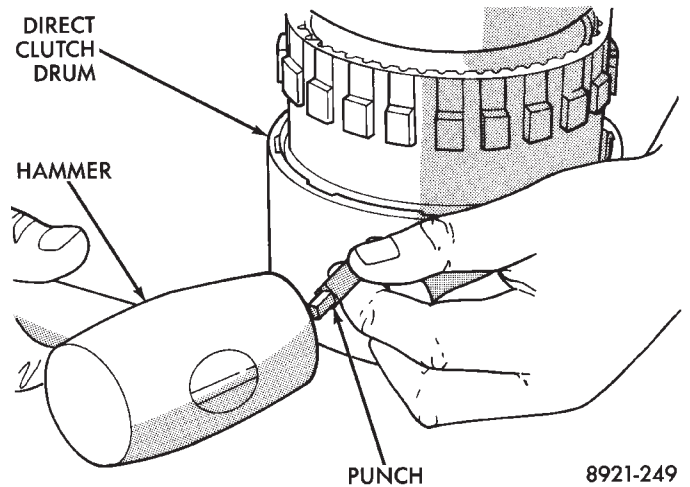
Marking Direct Clutch Drum And Annulus Gear For Assembly Alignment
